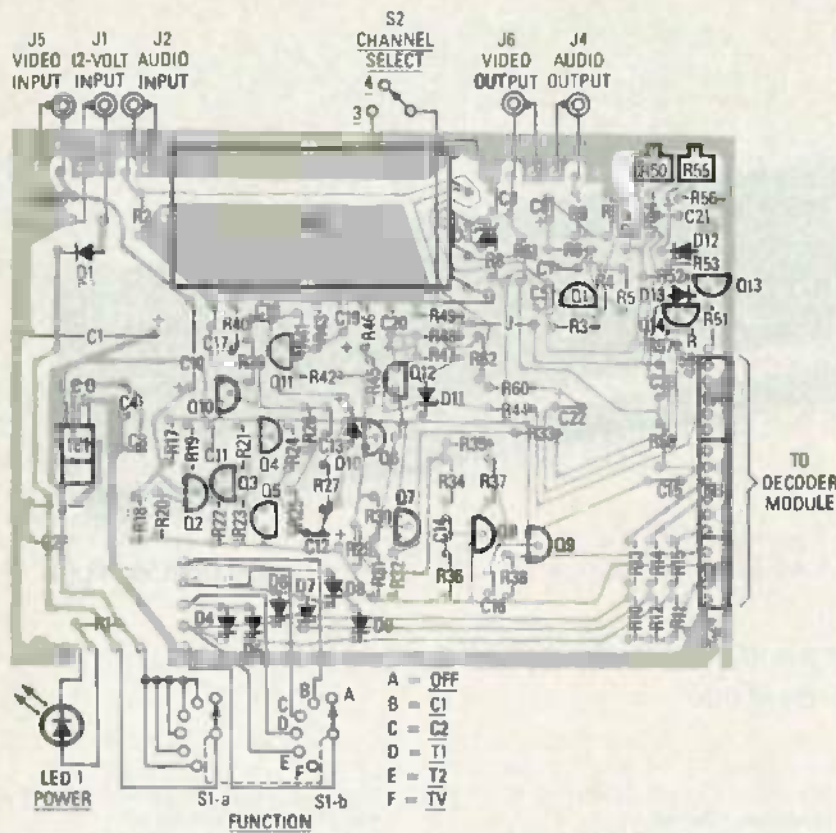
MOST COMPONENTS EXCEPT THE SWITCHES AND J1 mount on the PC board. Use PC-board pins to connect the off-board components.
